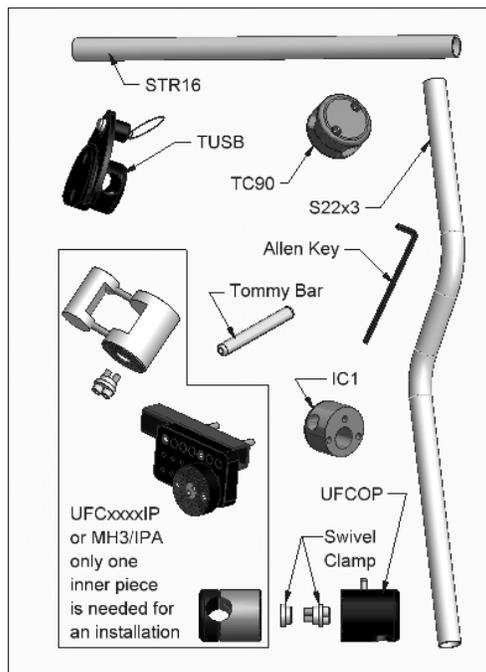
The DAESSY Bent tube Rigid Mount is a basic assembly.
